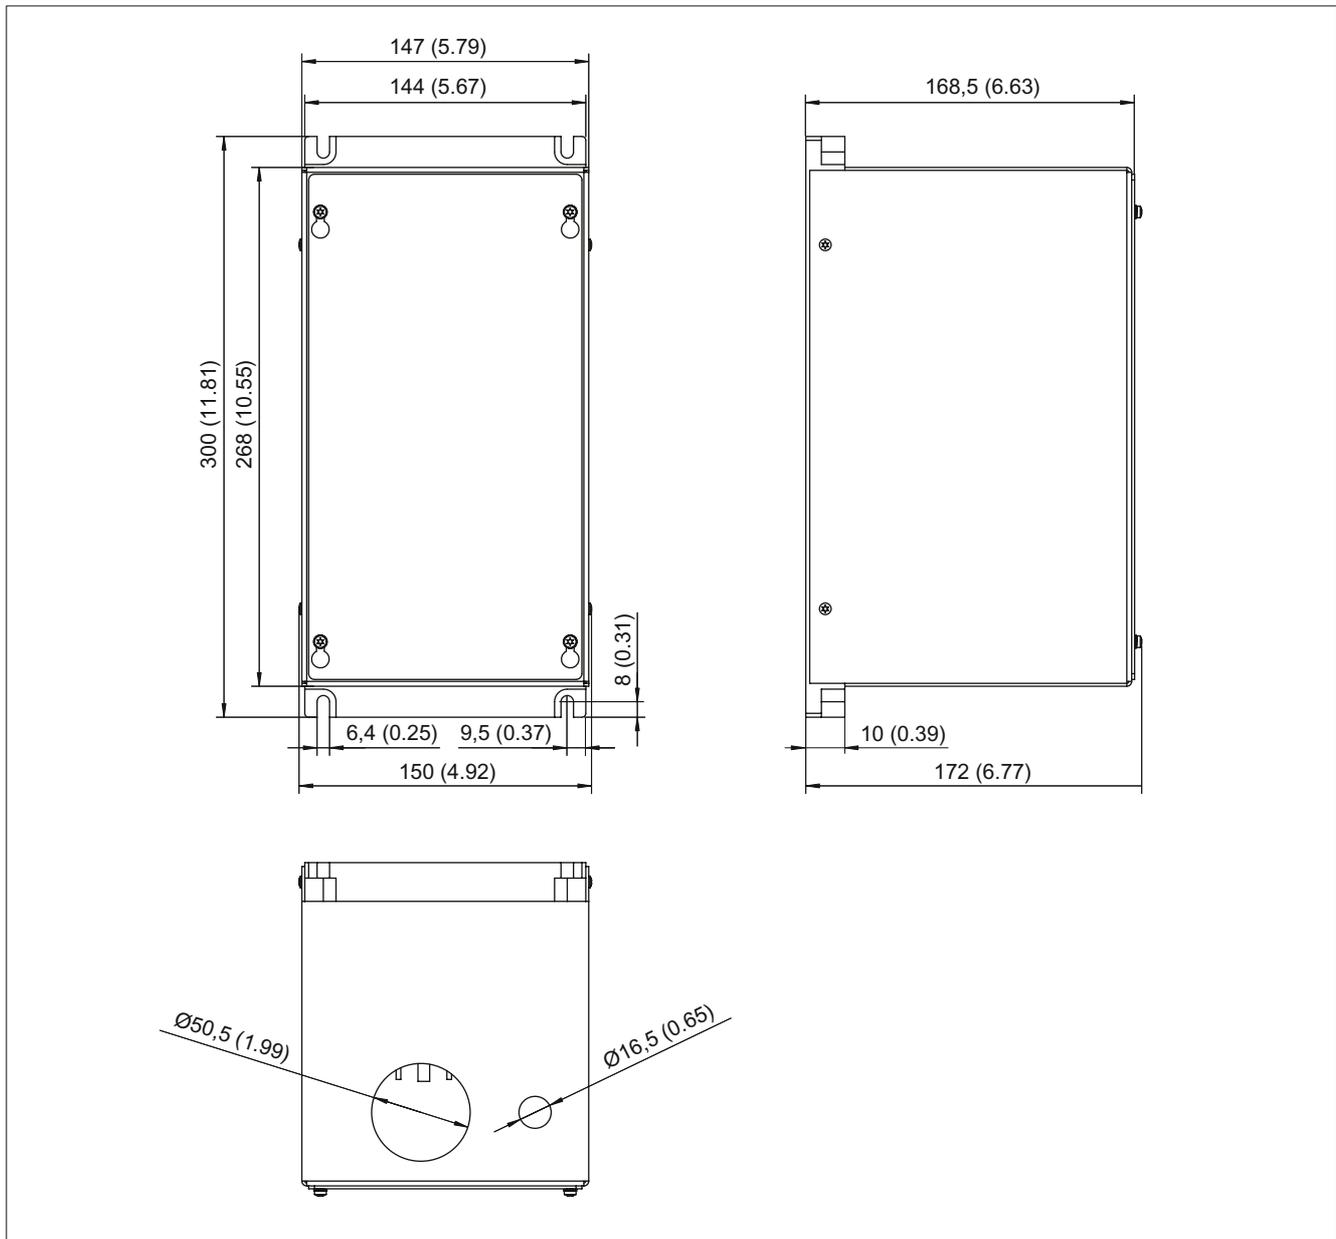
Dimension drawing of the Voltage Protection Module VPM120, all data in mm and (inches)
